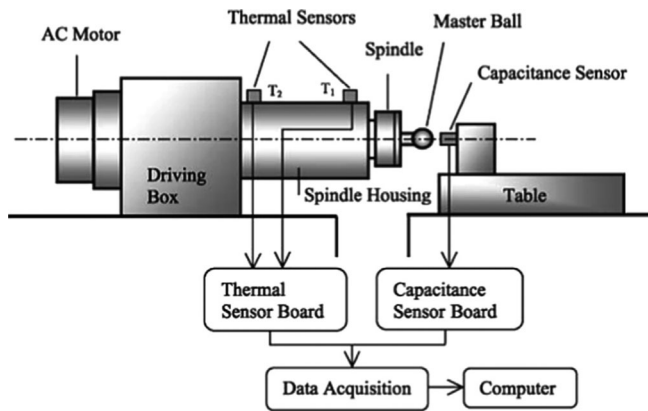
Experimental arrangement for thermal error measurement in machine tool spindle using capacitance sensors (Reproduced with permission from Elsevier, License Number: 5161750591218) Ref. [110]
